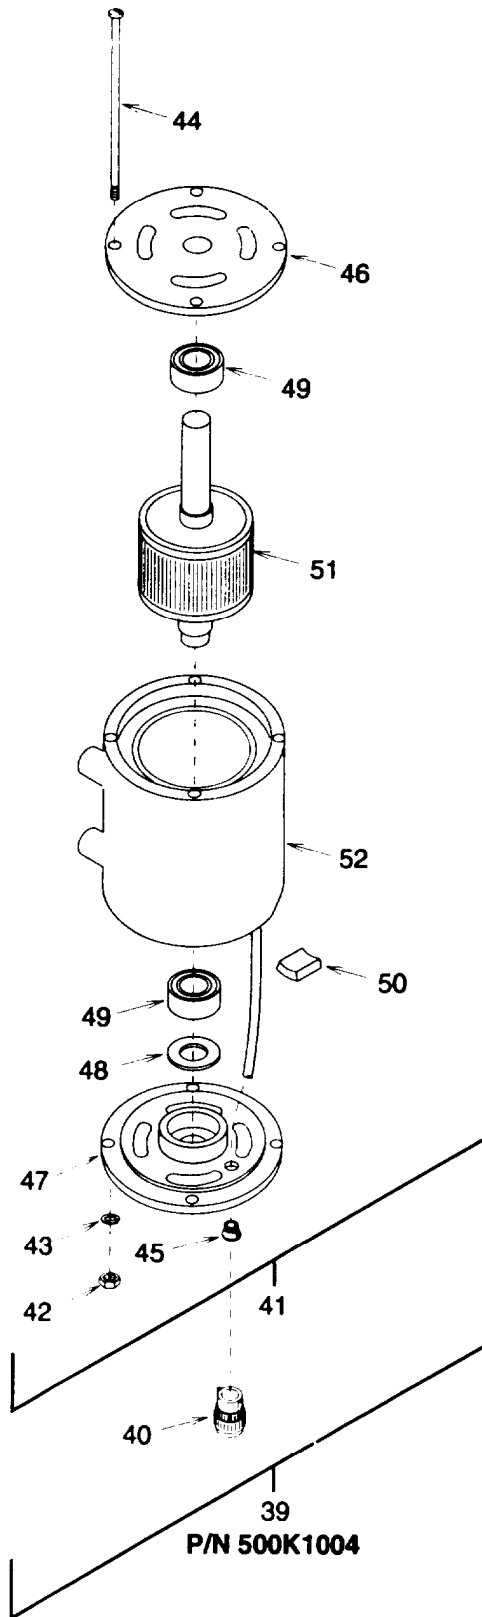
Evaporator Fan Motors (Sheet 2 of 2)
